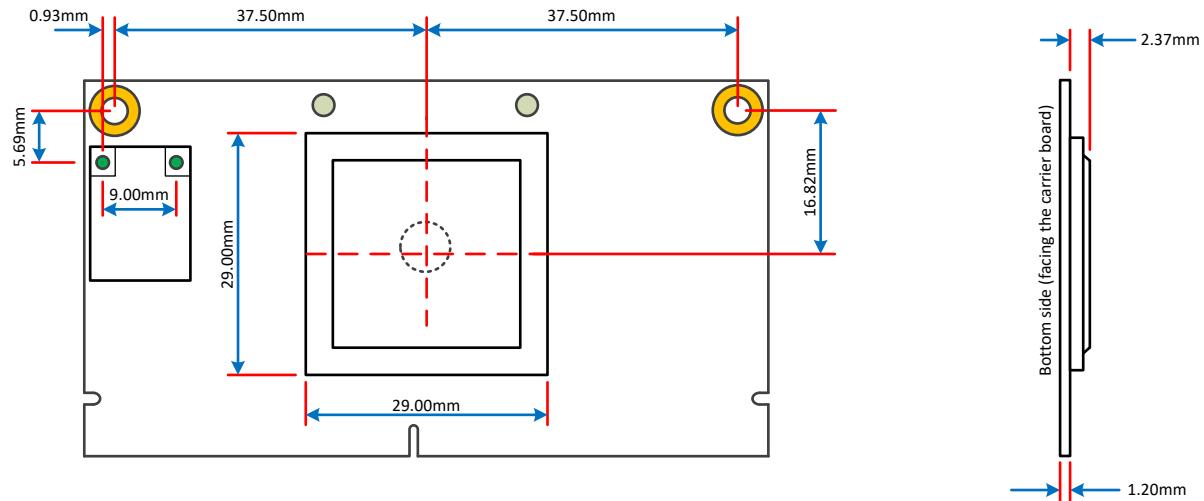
Mechanical position of i.MX 8 SoC (top view)
